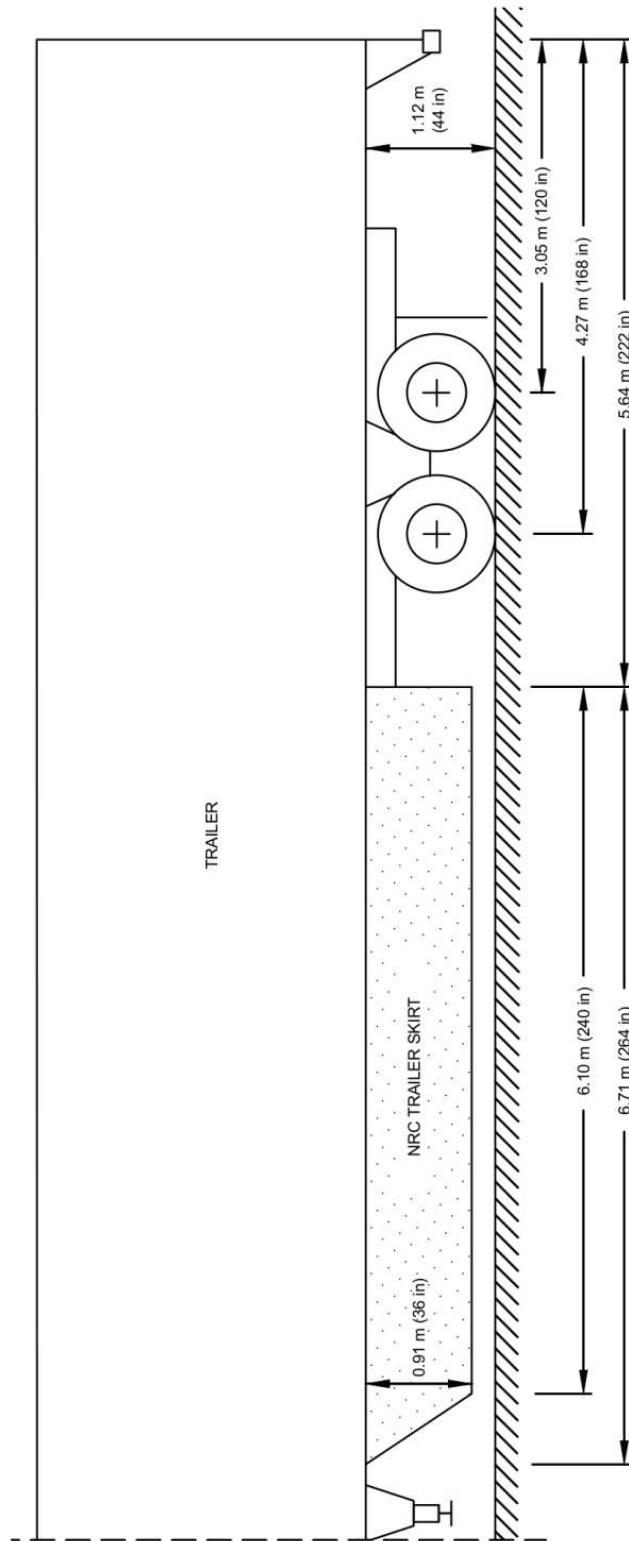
Dimensions and placement of the NRC Truck Skirts on a tractor trailer. Full scale dimensions are indicated.
